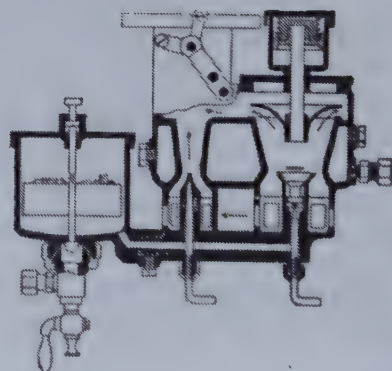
A Carburetor side float with a "double jet" spray nozzle.
